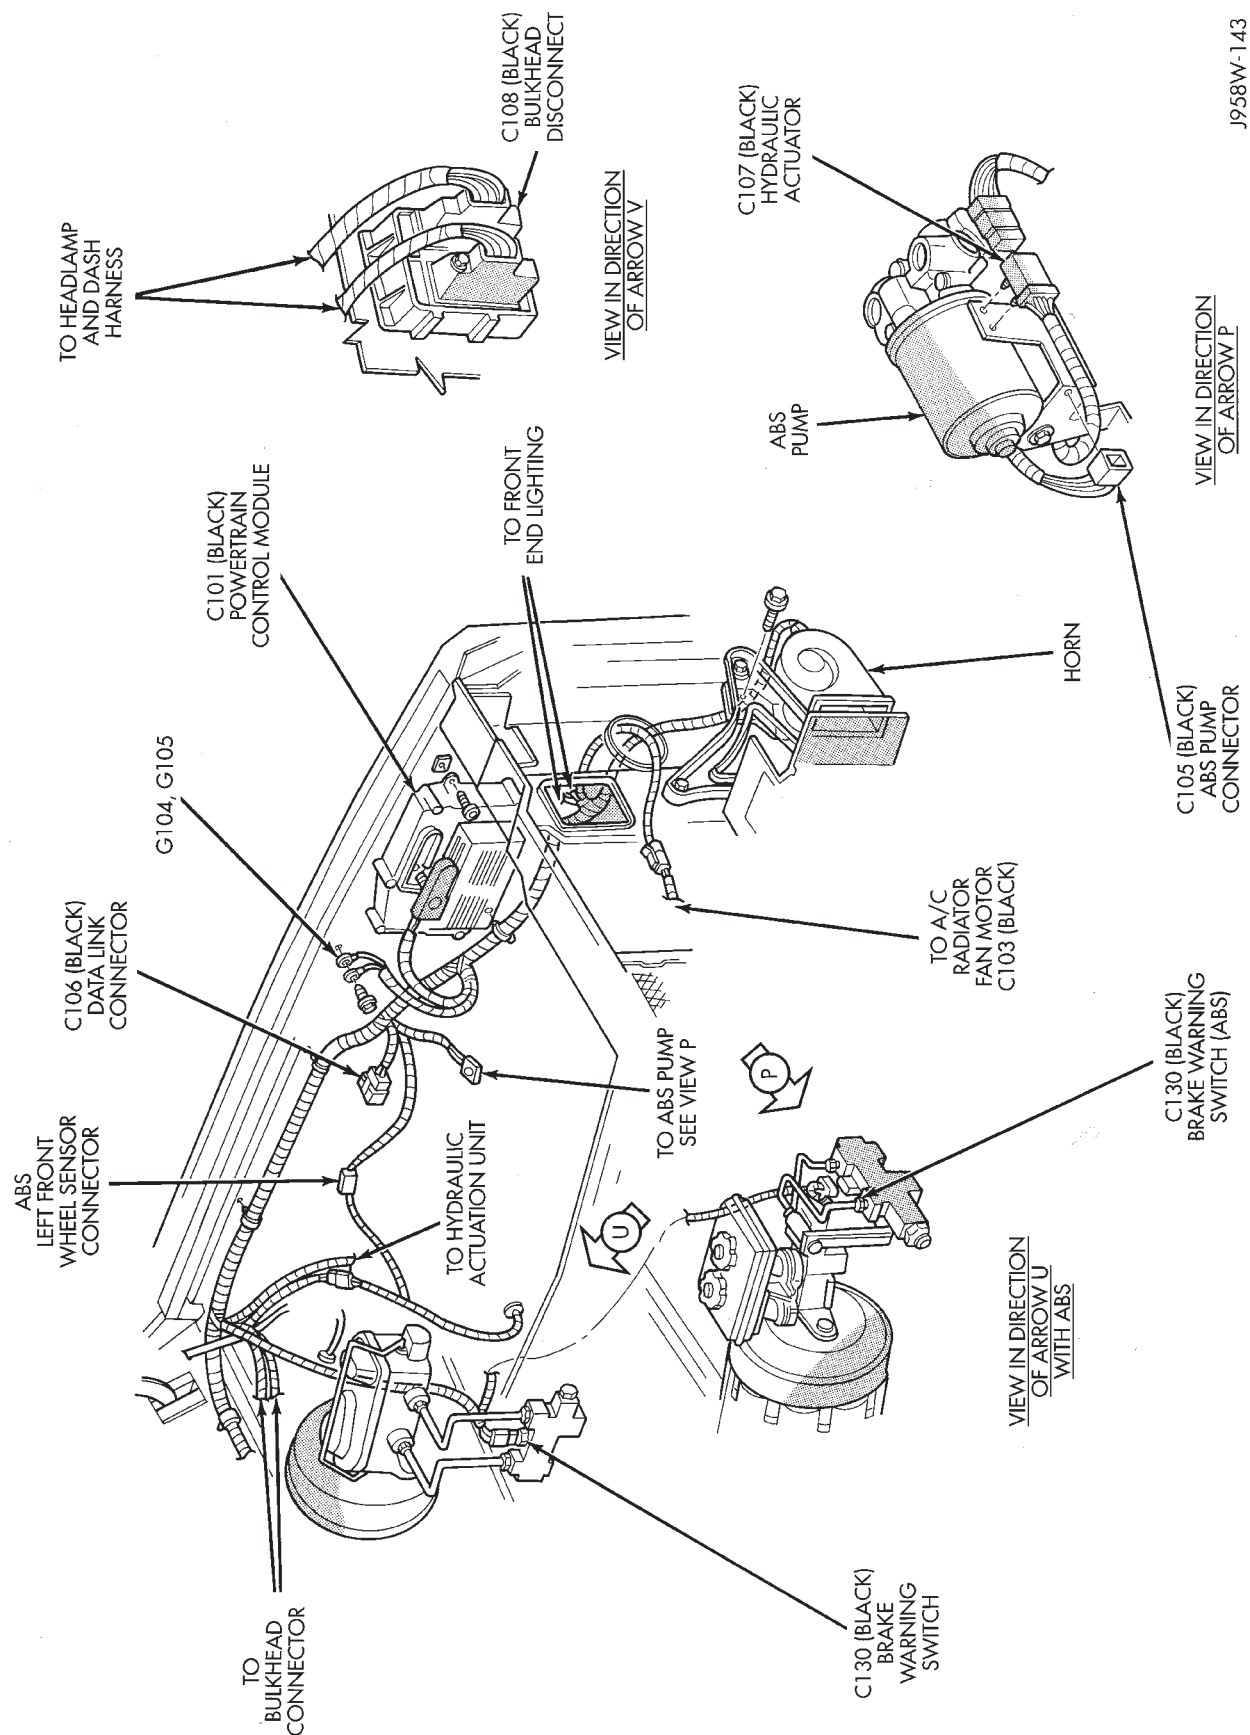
Engine Compartment Wiring Connectors—4.0L
